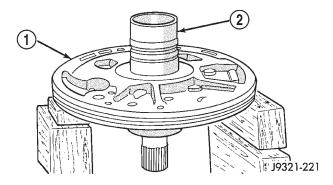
Assembling Reaction Shaft Support And Pump Housing
